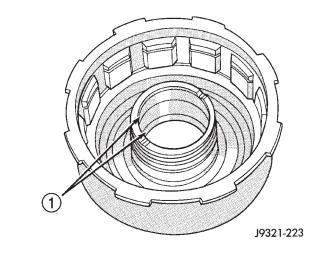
Retainer Bushing Location/Inspection 1 – FRONT CLUTCH RETAINER BUSHINGS (NON-SERVICEABLE)
